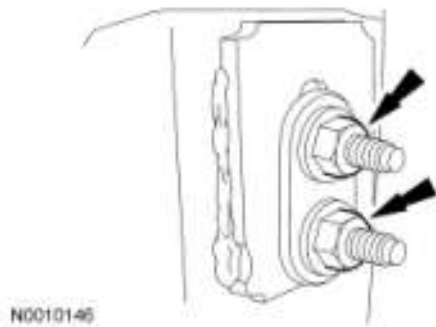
Detaching Starter Electrical Harness Support From Cylinder Block
